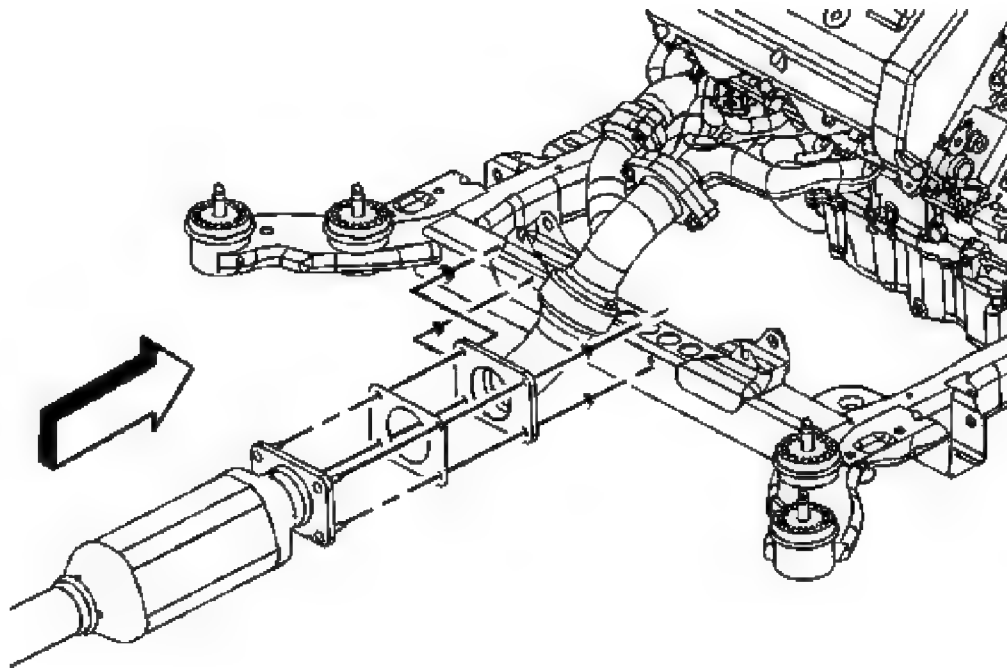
Identifying Muffler & Rear Exhaust Manifold Pipe Nuts
